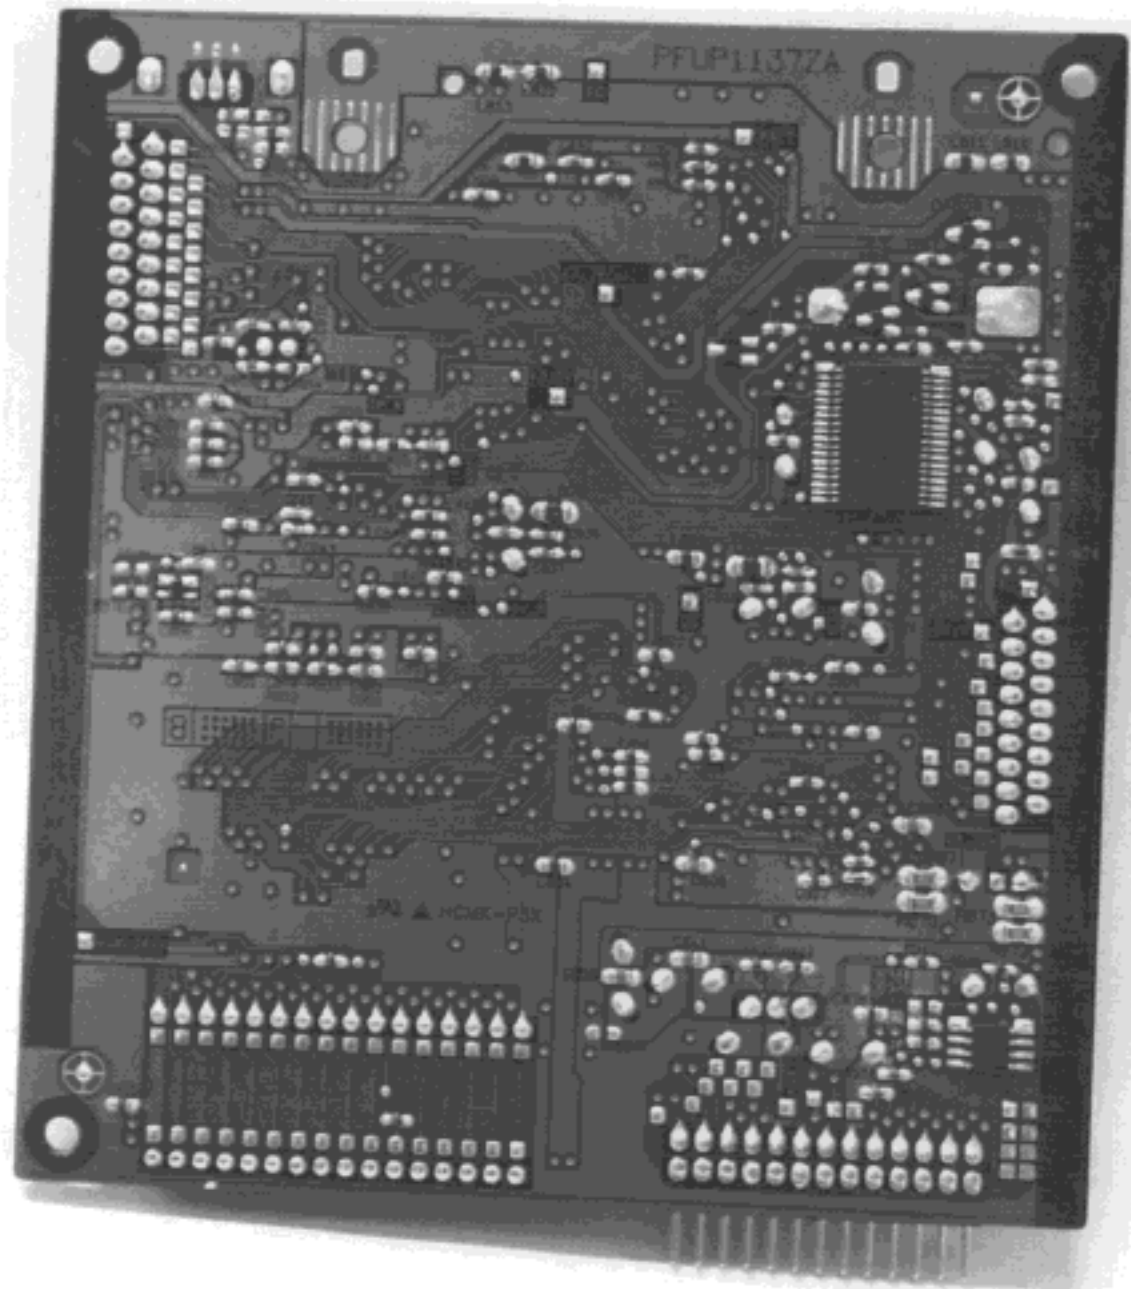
ANALOG BOARD COMPONENTS SIDE
